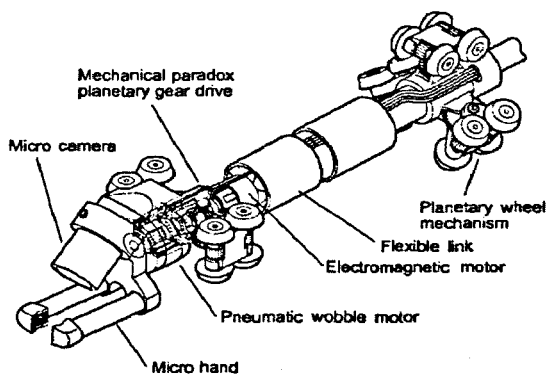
Configuration of a wheel-driving micro inspection robot
